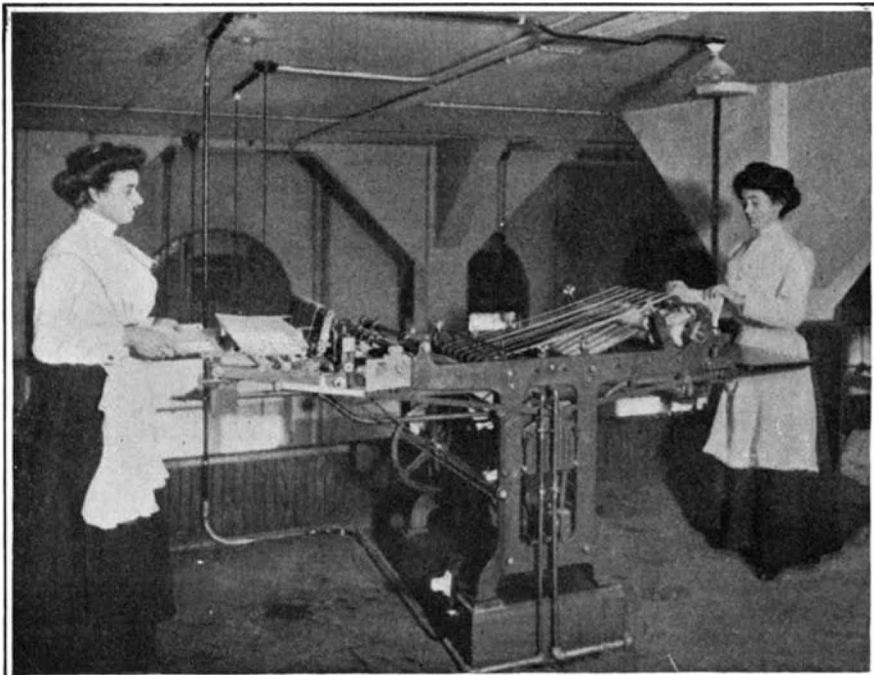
View showing the feeder of the dampening machine and how paper is passed up through the wringer.
